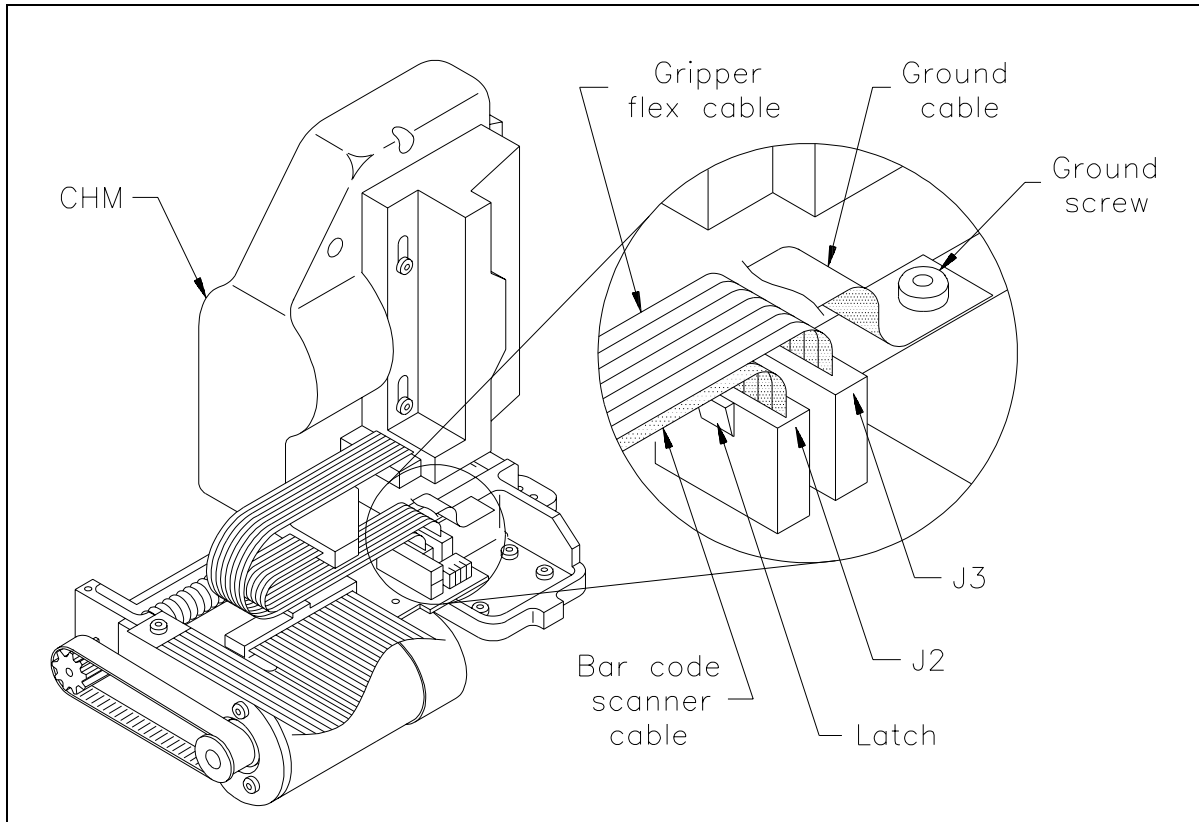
Reconnecting the bar code scanner cable and the gripper flex cable
